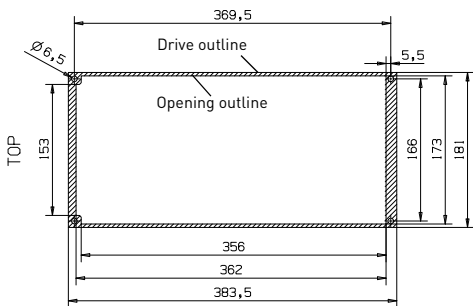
Flange mounting cutout dimensions for MI4 (Unit: mm)
